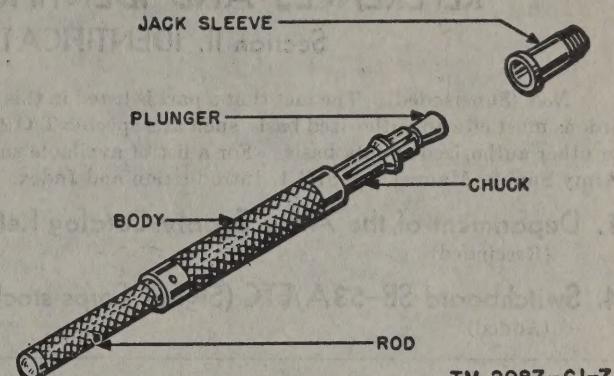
(Added) Switchboard SB-53A/FTC, jack sleeve tool.
